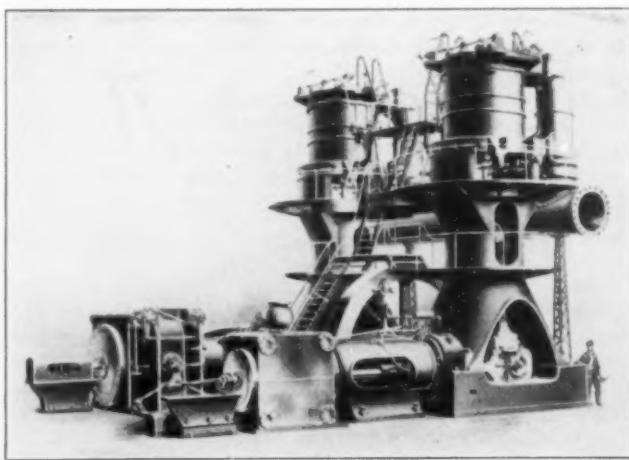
HORIZONTAL VERTICAL CROSS-COMPOUND, 52-IN. AND 90-IN. STEAM, 90-IN. AND 90-IN. AIR X 60 STROKE BLOWING ENGINE CO., THE WM. TOD CO.
